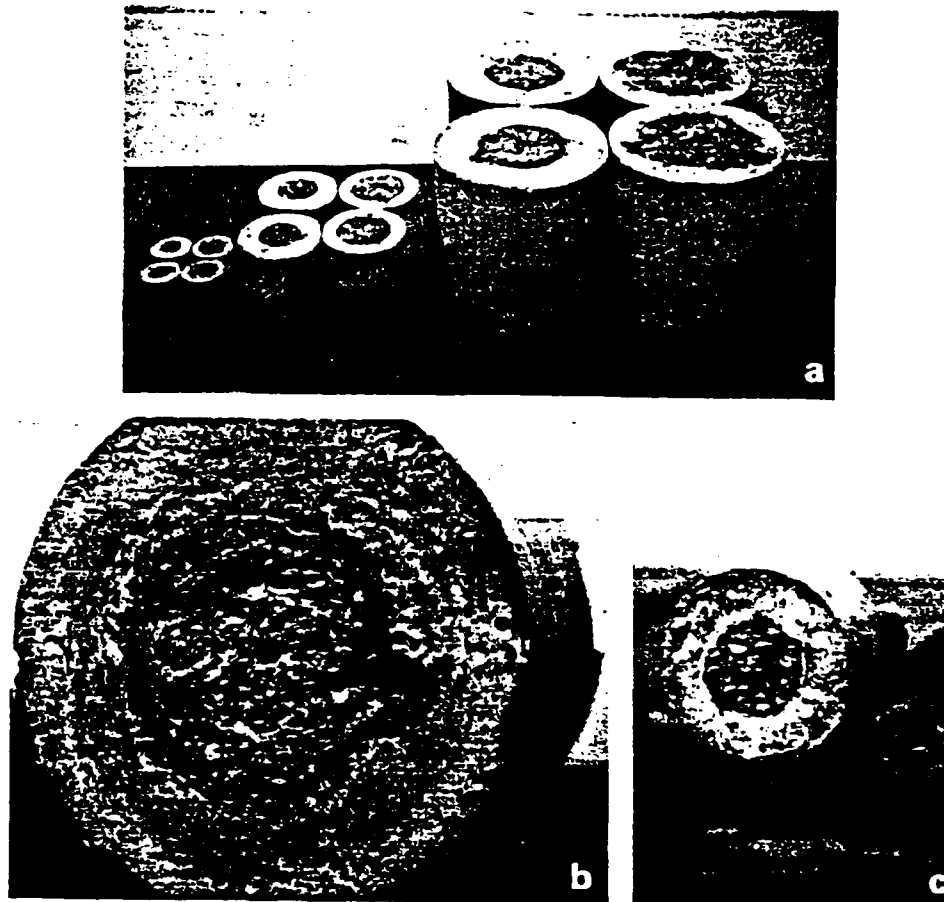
Fractured specimens after testing, showing the failure surfaces
